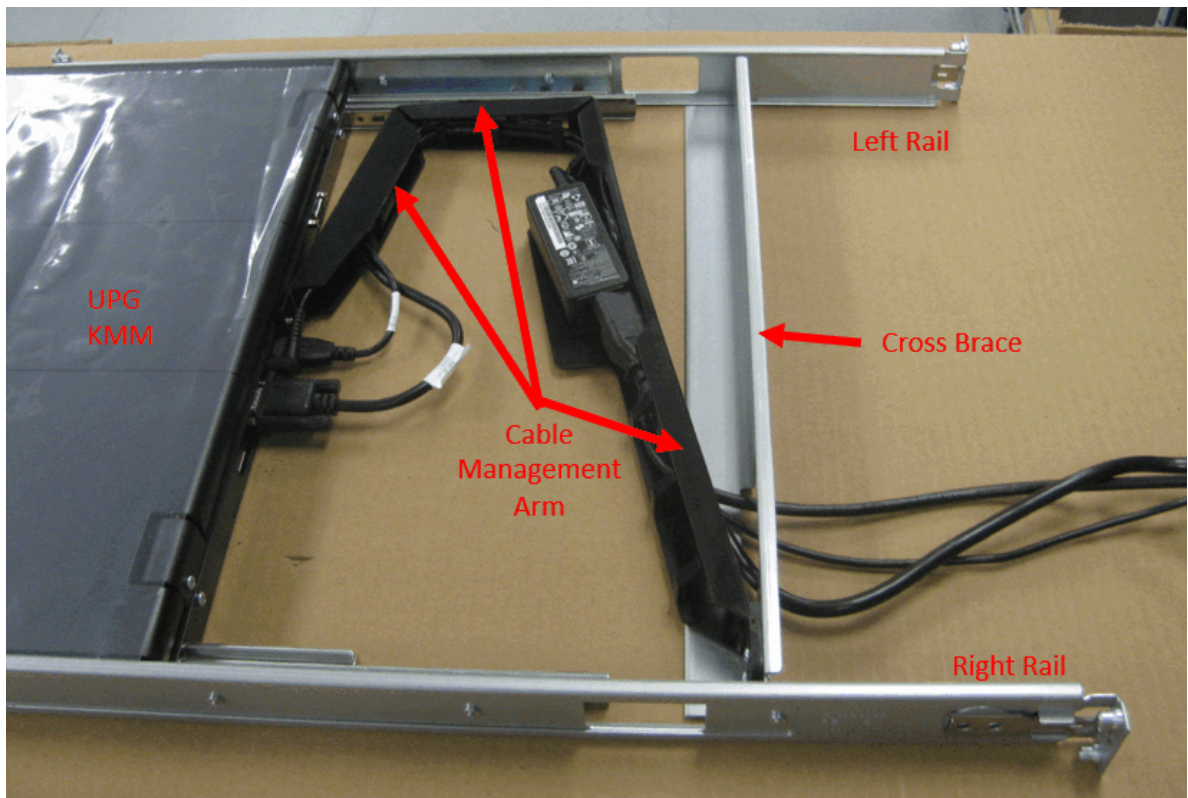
KMM rail assembly with cable management arm, cross brace, and cables installed
